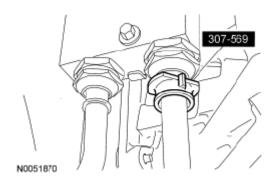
Disconnecting Transmission Cooling Tubes Courtesy of FORD MOTOR CO.
